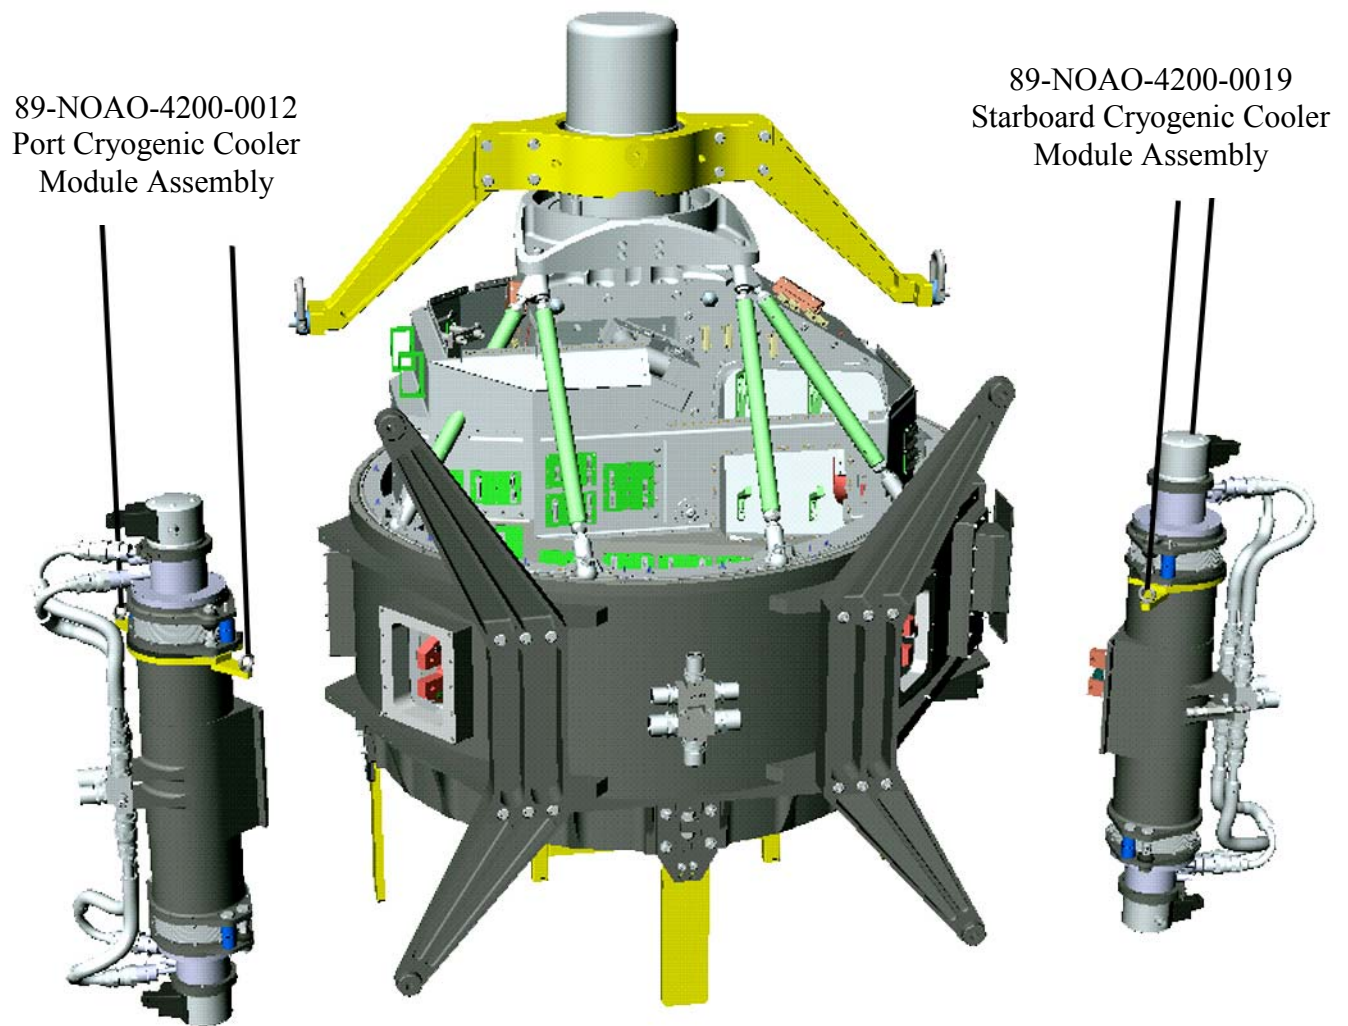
Remove Cryogenic Cooler Module.
